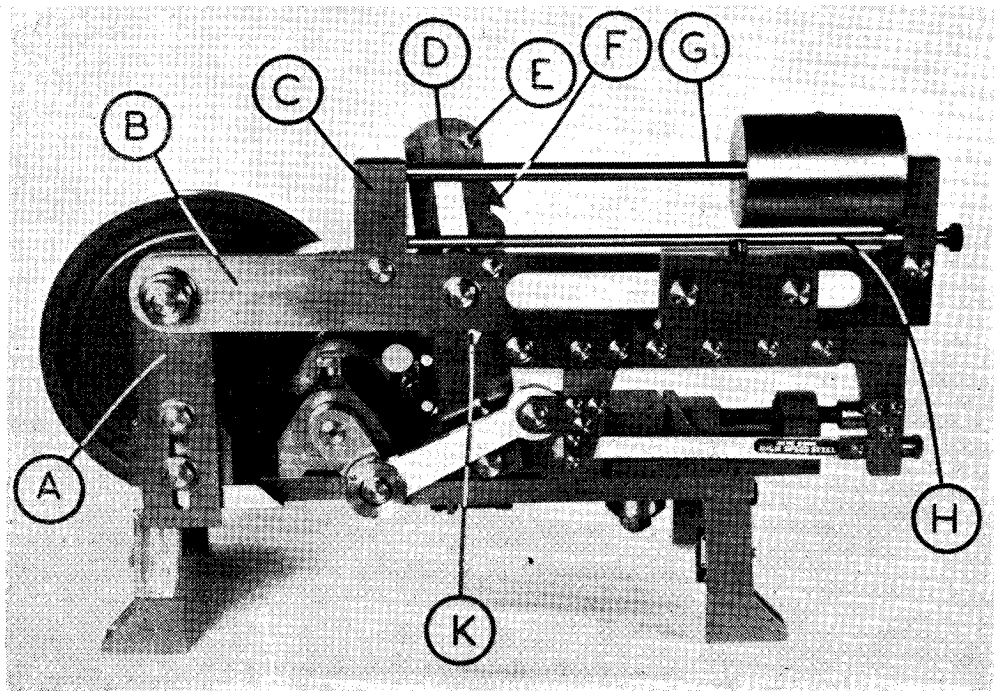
A—Beam pivot arm ; B—Beam ; C—Weight shaft bracket ; D—Beam guide arm ; E—Latch pin ; F—Beam catch ; G—Weight shaft ; H—Catch control-rod ; K—Stop-ball
